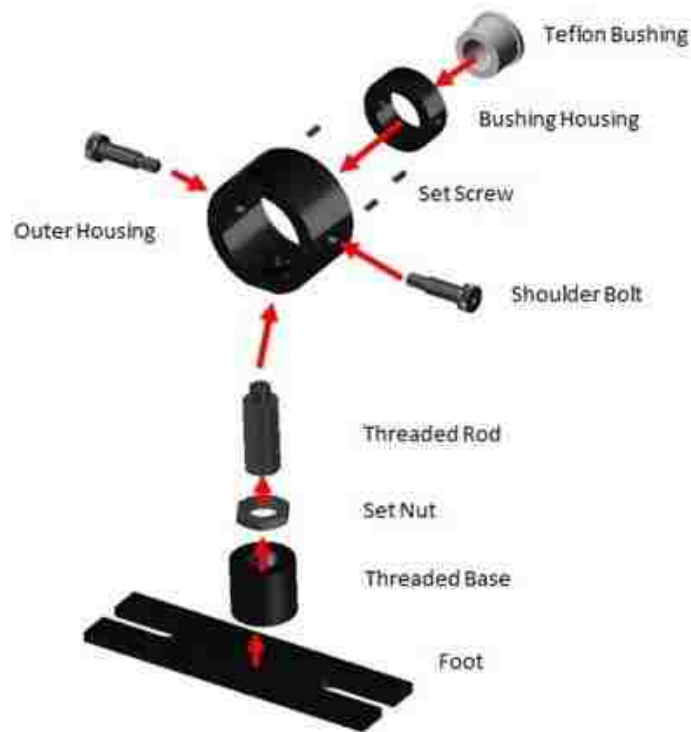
Exploded view of SHPB bar holder (Zanettin, Young, & Hussain, 2012)
